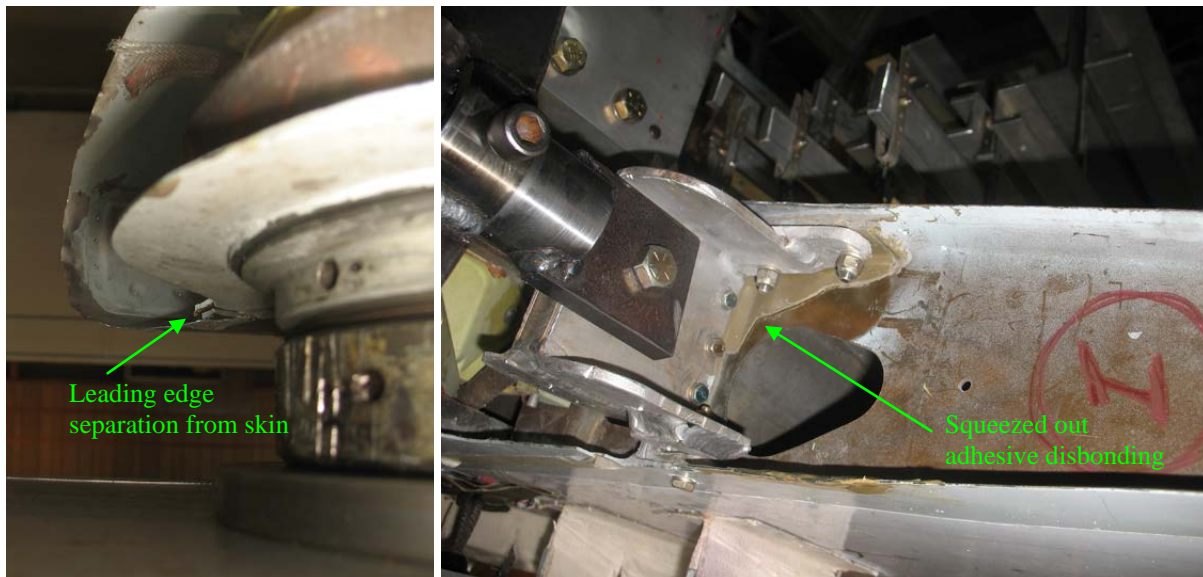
Visual inspection findings after load block C (40,016 cycles)
